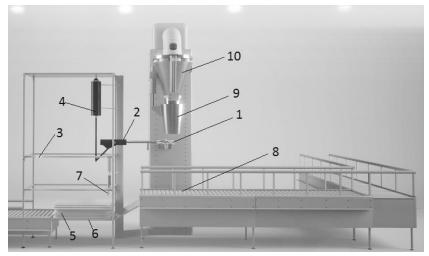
3-dimensional computer transfer machine line model for packaging granular materials.
